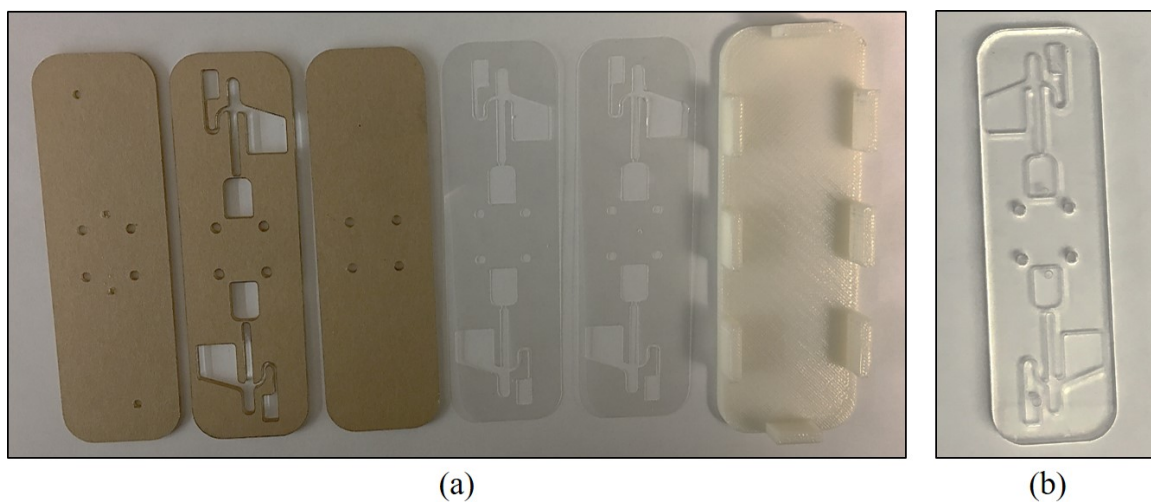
Five-layer chip fabrication and assembly. (a) Individual shaped layers after cutting, and the alignment rig used for assembly. From left-right: top acrylic layer, middle acrylic layer, bottom acrylic layer, two layers of PSA, and the alignment rig. (b) The final assembled chip, with layers bonded together.
